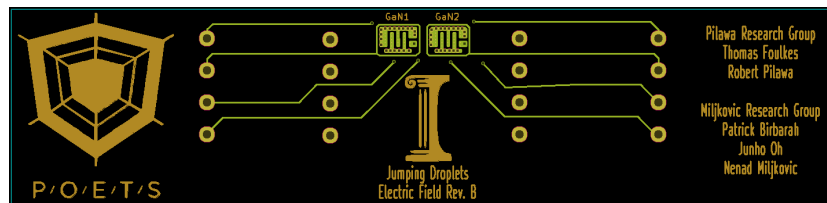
PCB artwork for drill locations and for the front copper, front mask, and front silk layers of revision B.
